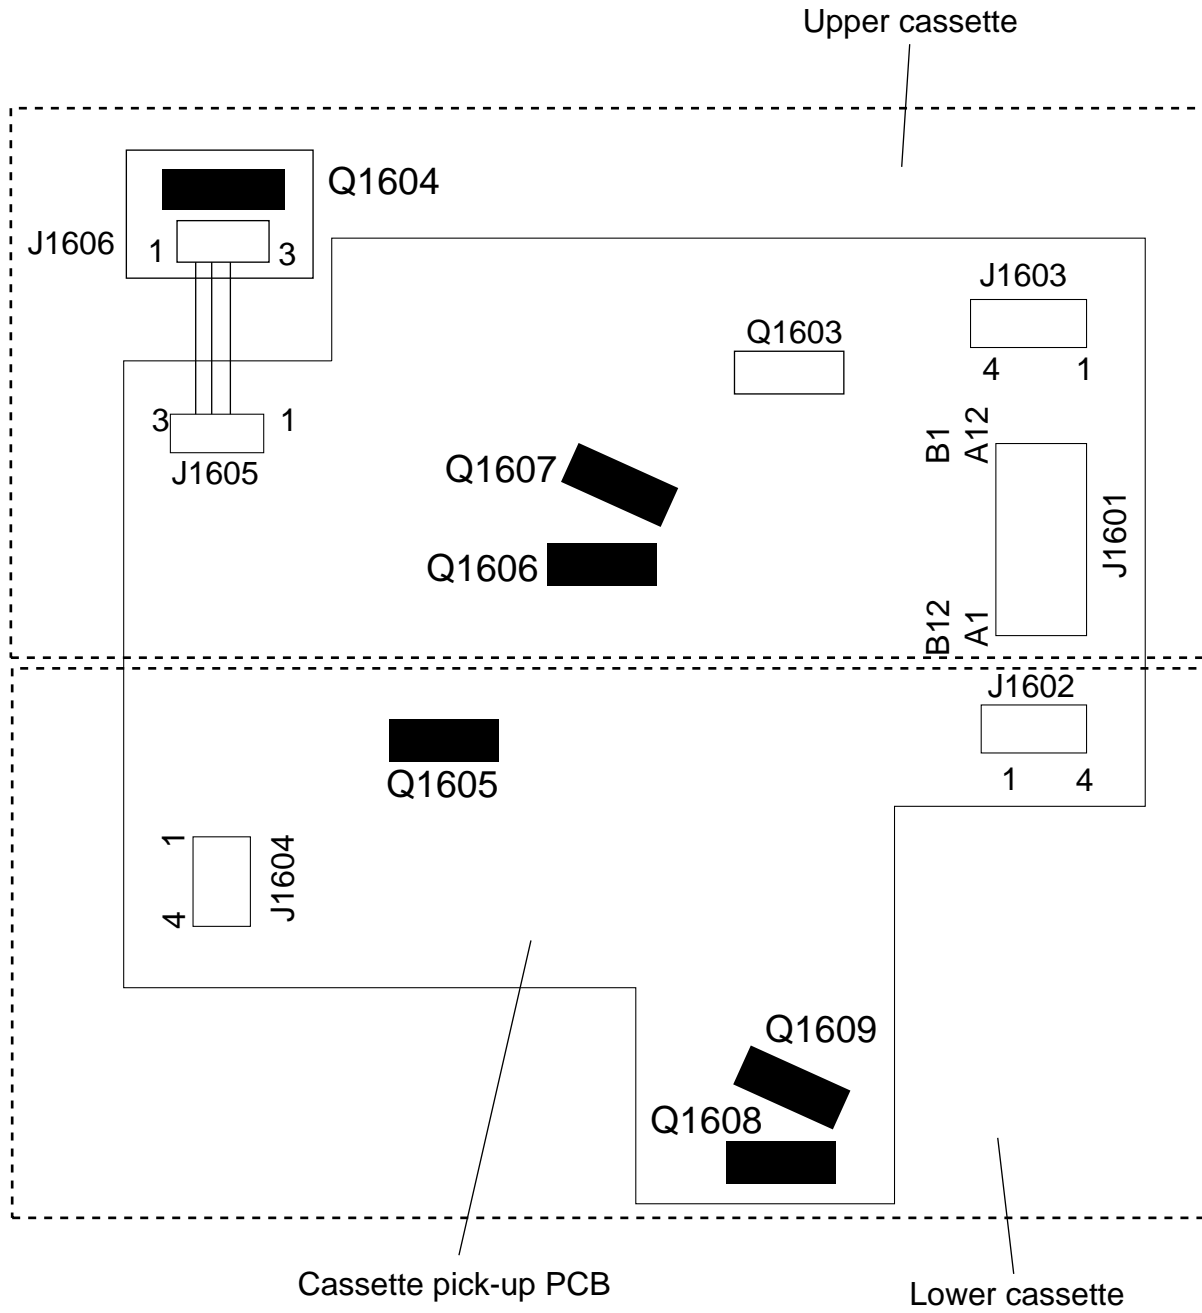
Sensors on the Cassette Pick-Up PCB
